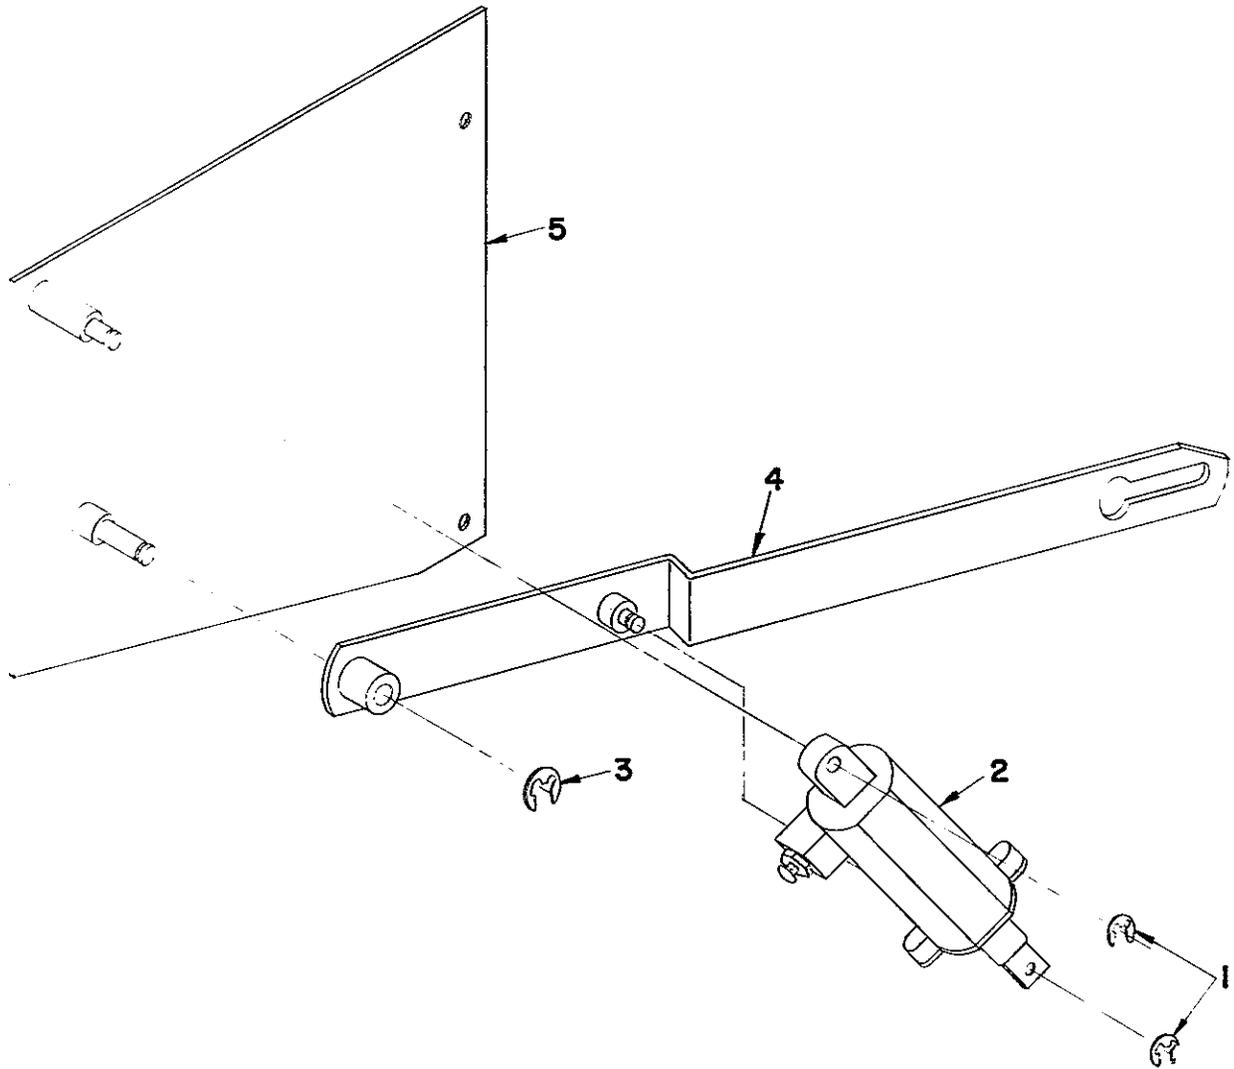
CUP DOOR DAMPENING ASSEMBLY
